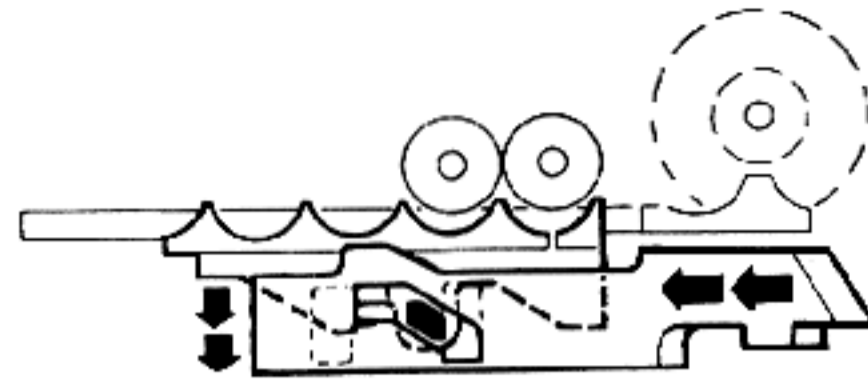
Cam on Bolt Rotates Feed Drum and Feed Sprocket.
